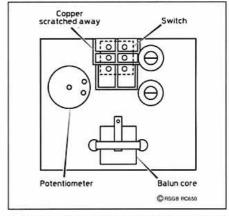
Layout showing the parts of the PCB removed by using a hacksaw blade.
